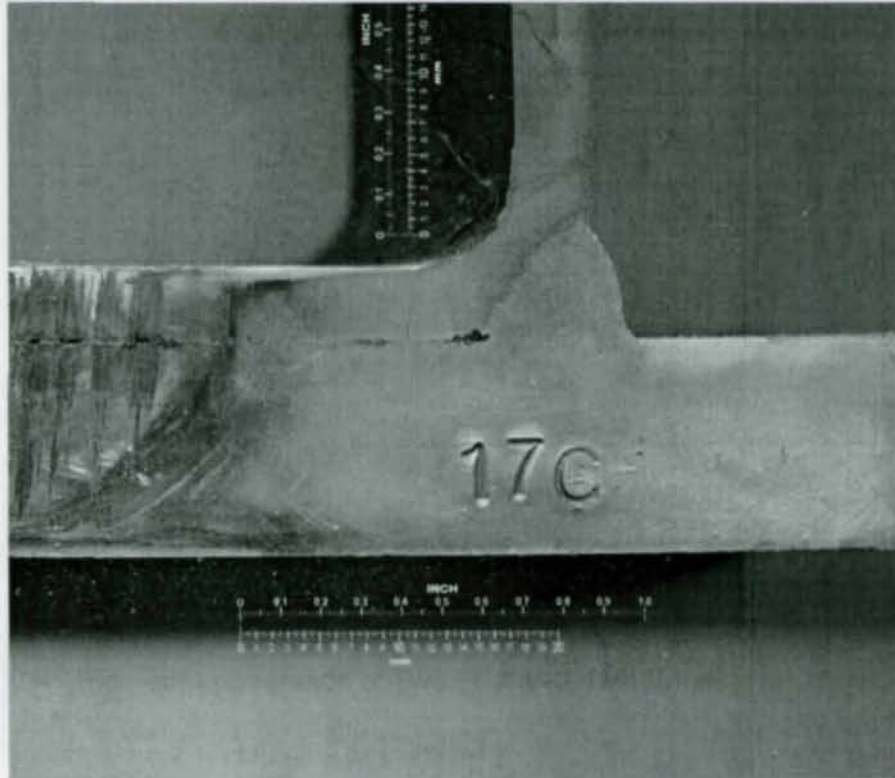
Scanned Image of Test Weld No. 17 Cross-section
